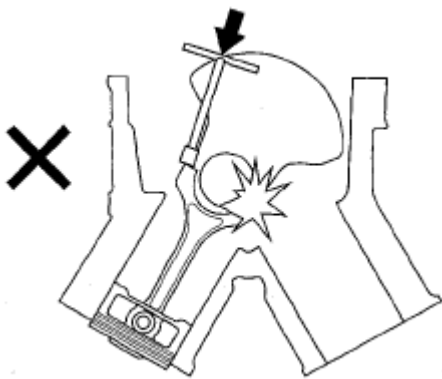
Removing Piston/ Connecting Rod Assembly (Incorrect Position)
